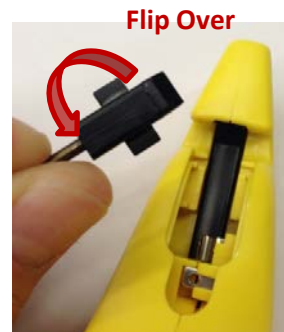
Slide the metal(bottom) part of the pin into the metal channel of the LED Keeper first. The metal channel will fit securely around the metal portion of the pin assembly. Then push the top part of the pin assembly into the LED Keeper. The black plastic part of the pin assembly should now make contact with the upper black plastic piece as the trigger is pulled.
